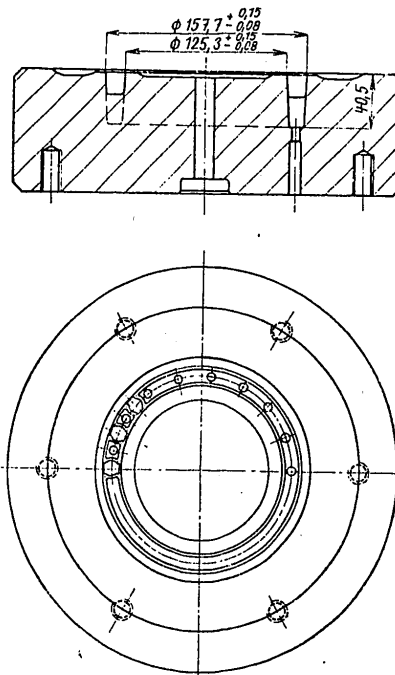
Electrochemically sunk forging die for the brass separator of the RN 220 bearing.
